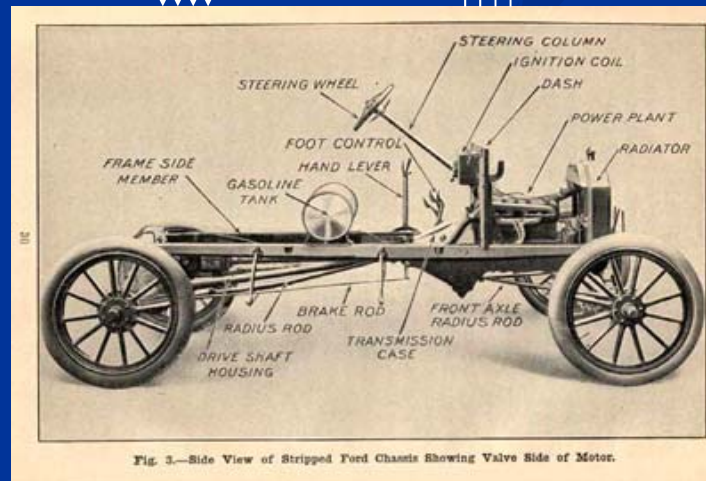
Side View of Stripped Ford Chassis Showing Valve Side of Motor.
